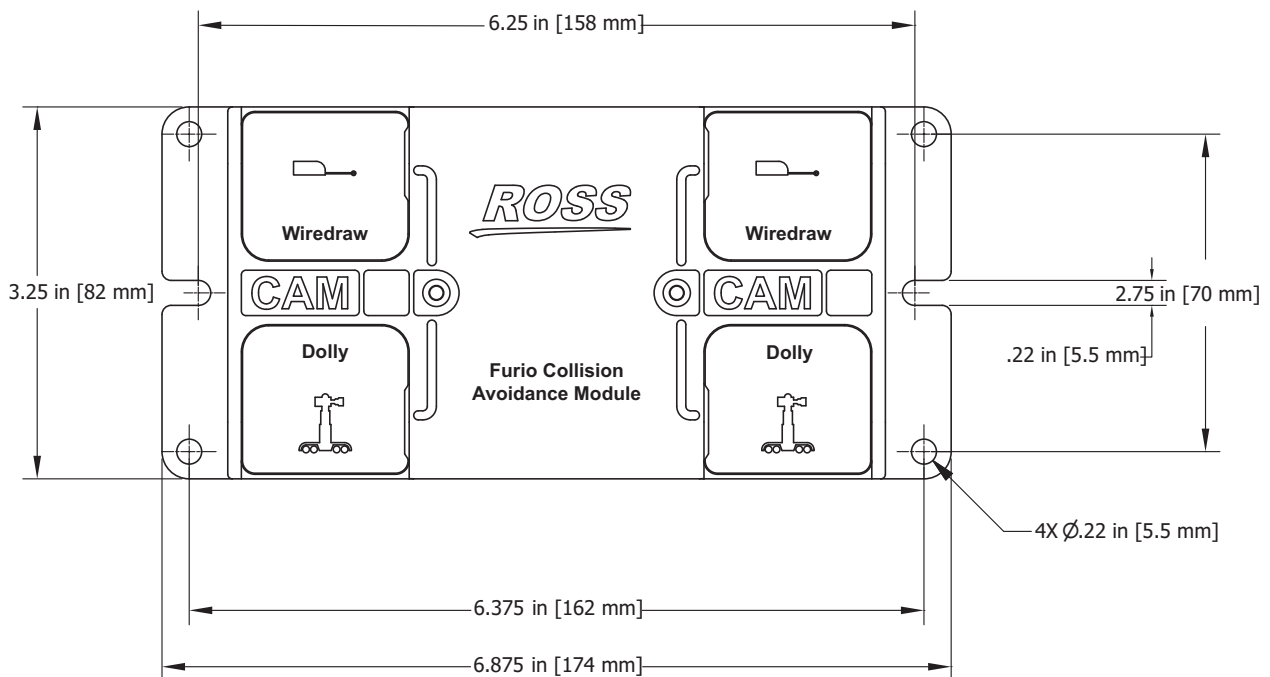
Mounting diagram showing the two end notches and four corner holes
